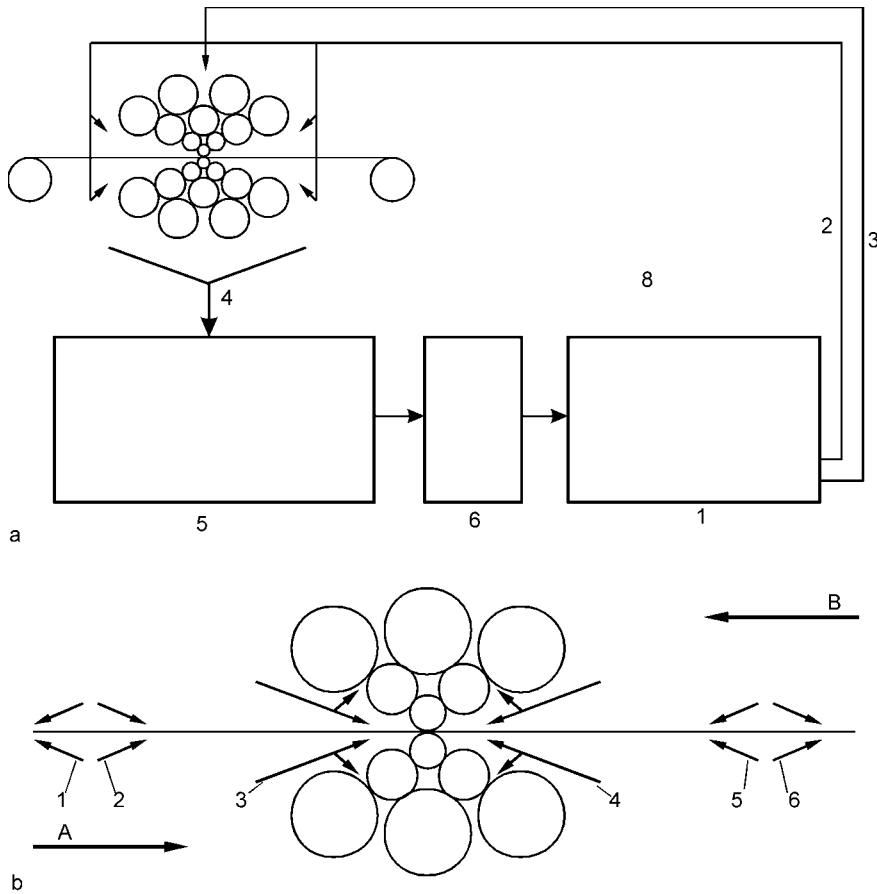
Rolling of stainless steel sheet on a multi-roll stand using rolling oil. (a) oil circulation: 1, oil tank with clean oil (e.g. 100 m³); 2, oil feed to lubricate the strip (12 bar); 3, oil feed for the lubrication of the roller bearings (6 bar); 4, oil return; 5, return tank with uncleaned oil (e.g. 169 m³); 6, oil
